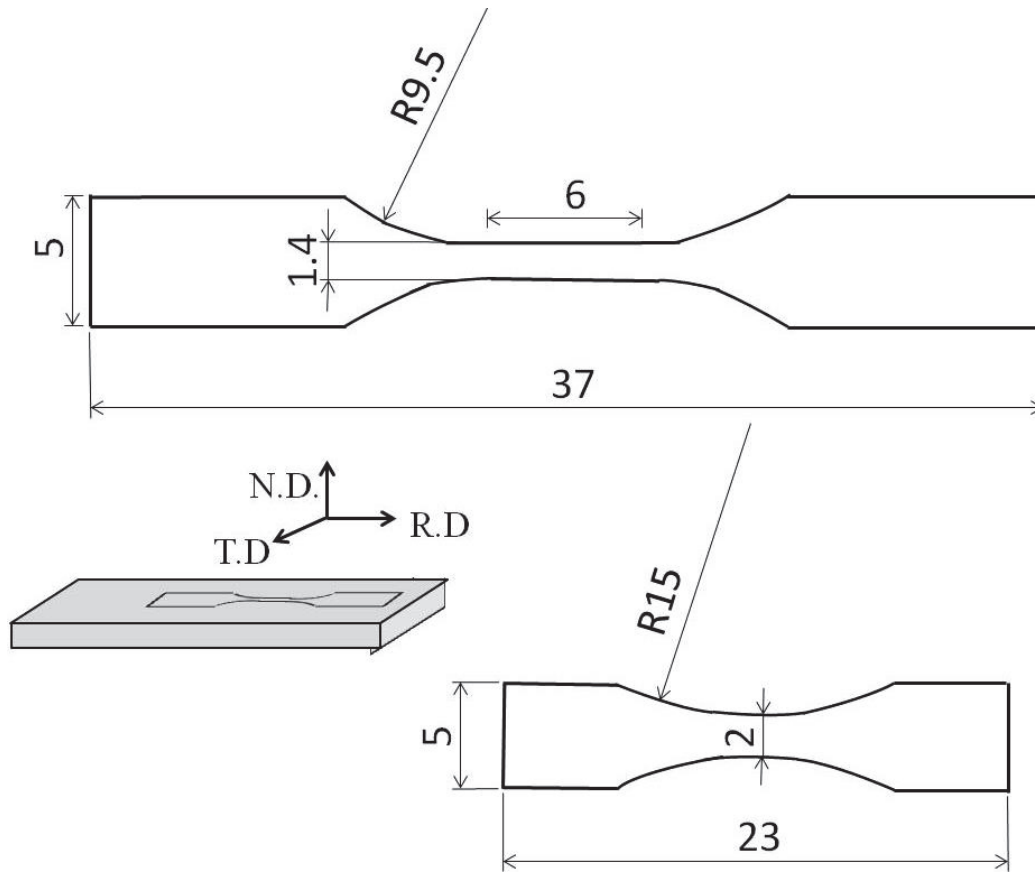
Specimen geometry of;(up) tensile test, (bottom) fatigue test.
